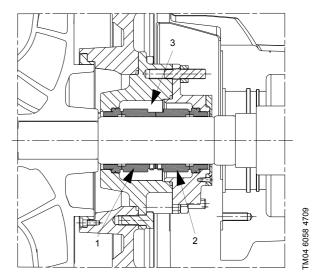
Back-to-back seal arrangement consisting of two shaft seals
